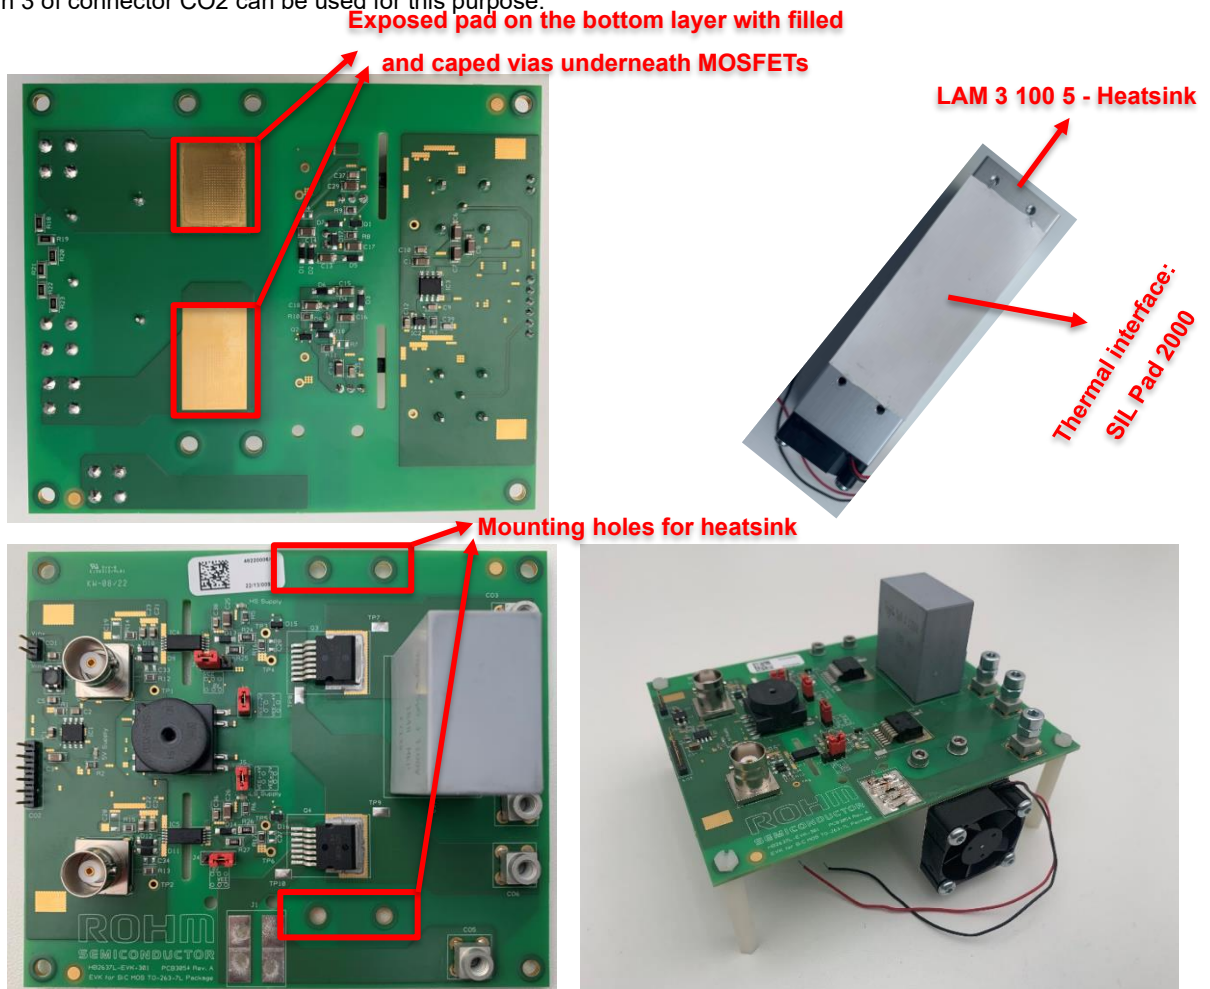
Board bottom view with exposed copper and filled/capped vias (top left), thermal interface material with heatsink (top right), Mounting holes for heatsink (bottom left), evaluation board mounted with heatsink (bottom right)
